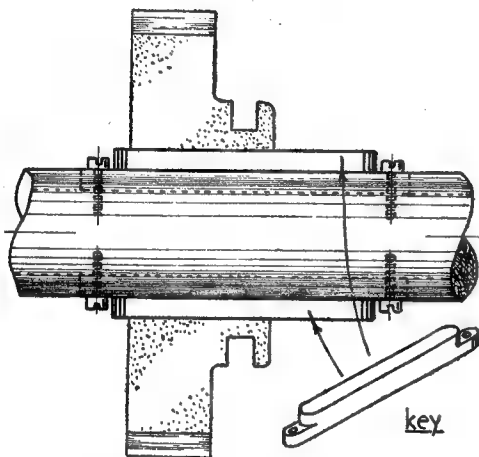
Showing a method used for locating the keys in a gearbox shaft
